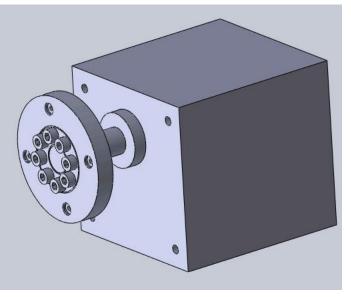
Keyless Bushing Assembly. The Keyless Bushing Was Used to Connect the Wheel Hub to the Motor Shaft
